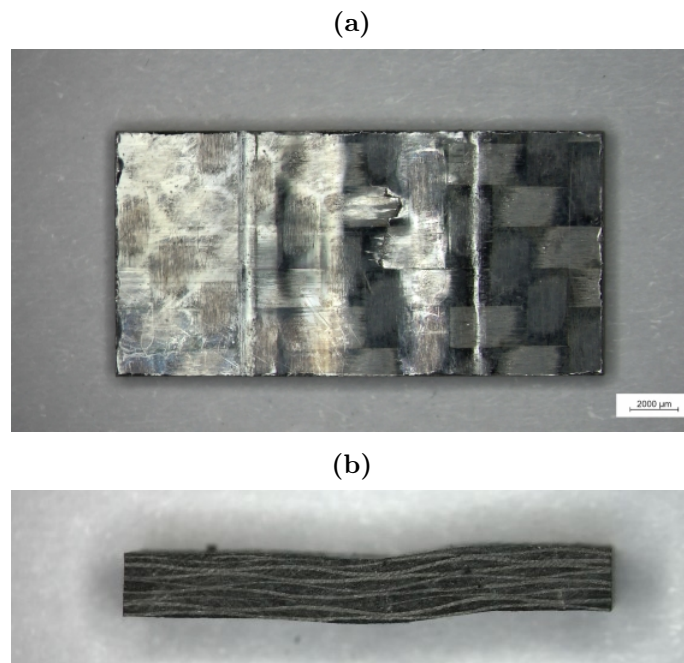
Image of the (4.26a) bottom side and (4.26b) side view of a wlu-fb-ep1_con specimen after testing, showing plastic deformation.
